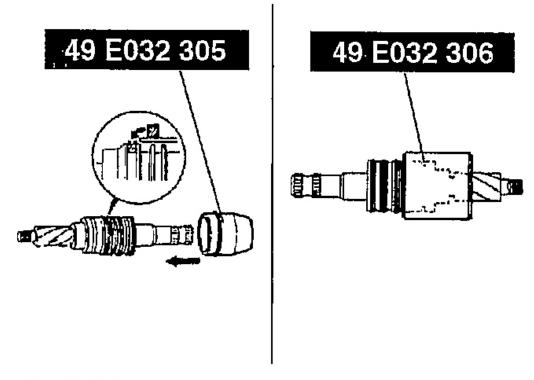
Pressing In Upper Bearing Courtesy of MAZDA MOTORS CORP.
